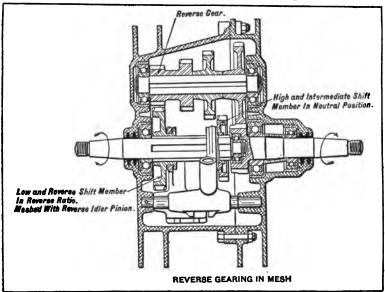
How the Large Sliding Gear is Shifted to Secure the Reverse Drive.
